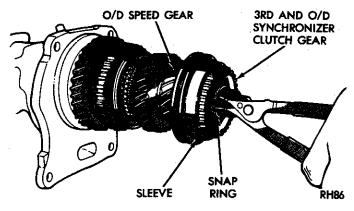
Removing/Installing Mainshaft Geartrain Snap Ring
